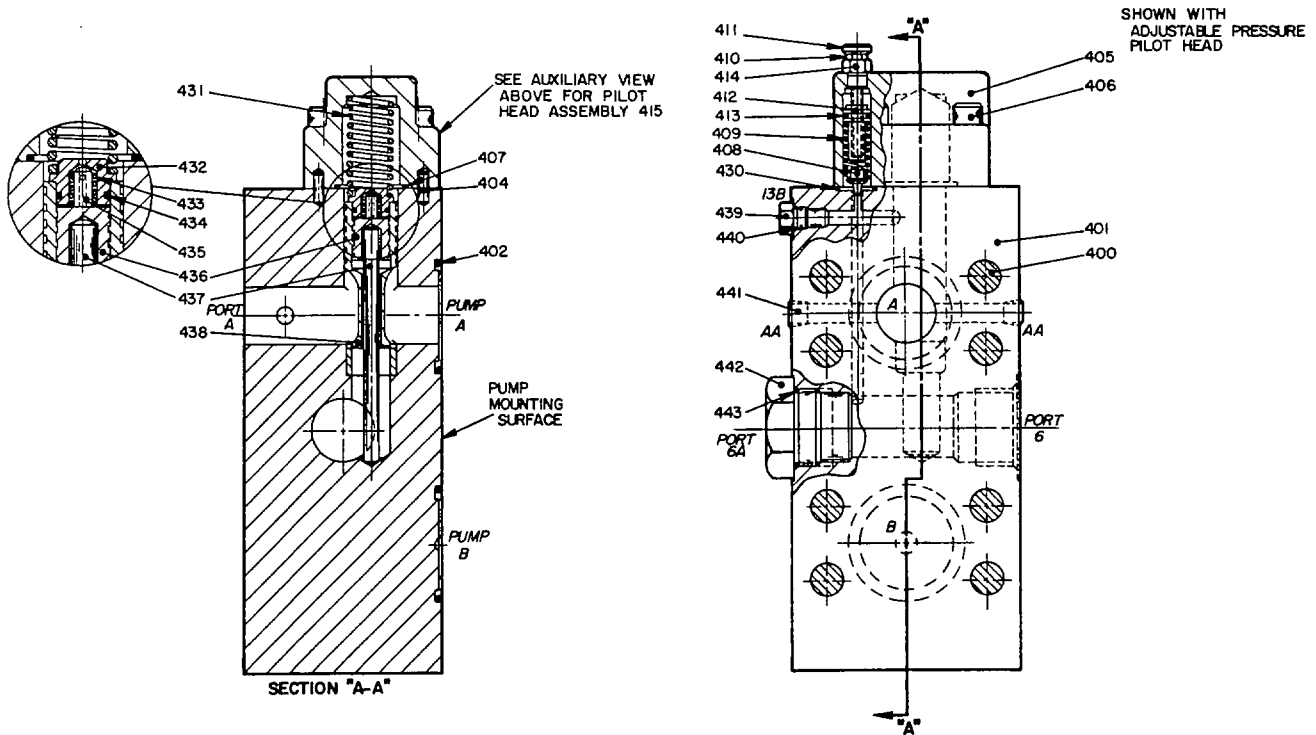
Parts Drawing "PFL" OPTIONAL H.P.R.V. Modules. DS-946077-B (509876-B).
